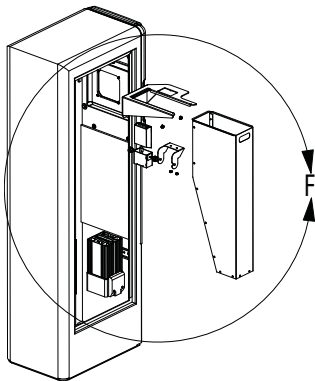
Barcode Exit Verifier (220VAC) Drawing, Detail F
